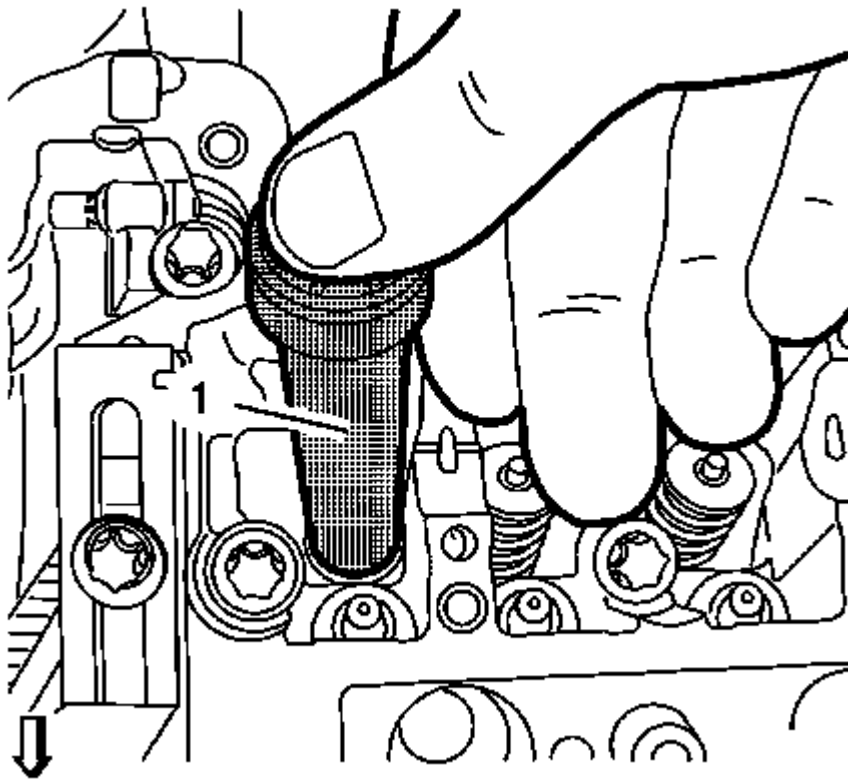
Intake Valve Stem Oil Seal Installation Tool
